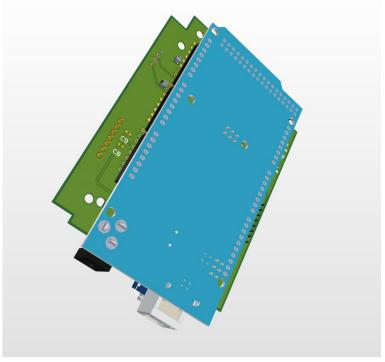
Bottom view of the PCB v2 with Arduino board
